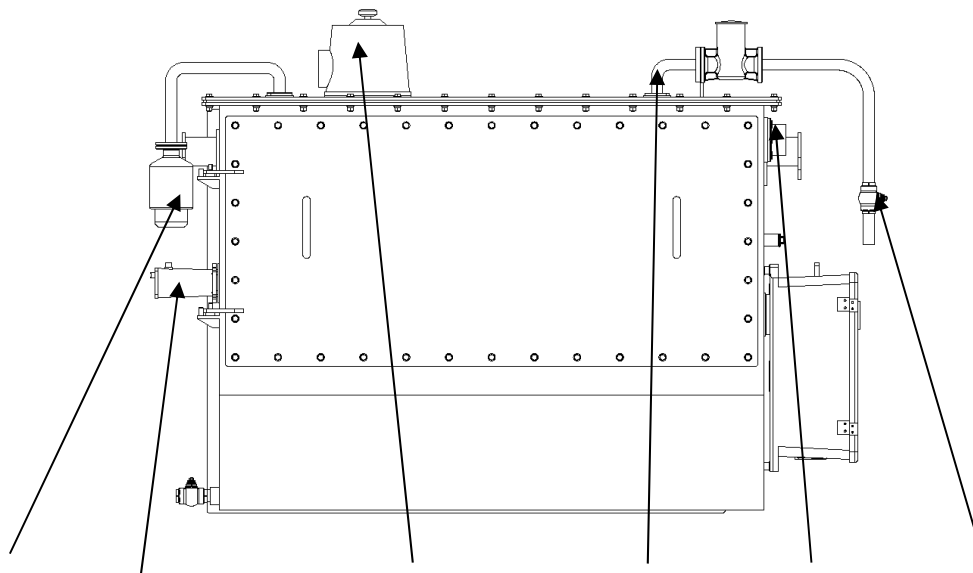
Breather Sudden pressure relay Pressure relief valve Oil filling pipe Oil level gauge Oil filling valve
